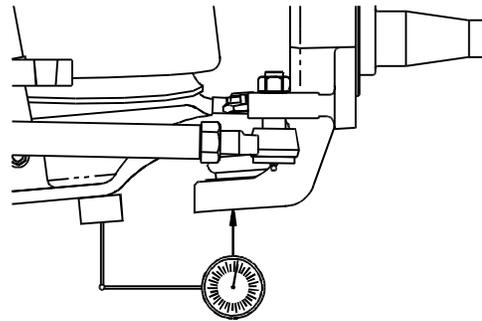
Lower Ball Joint Dial Indicator Mounting
